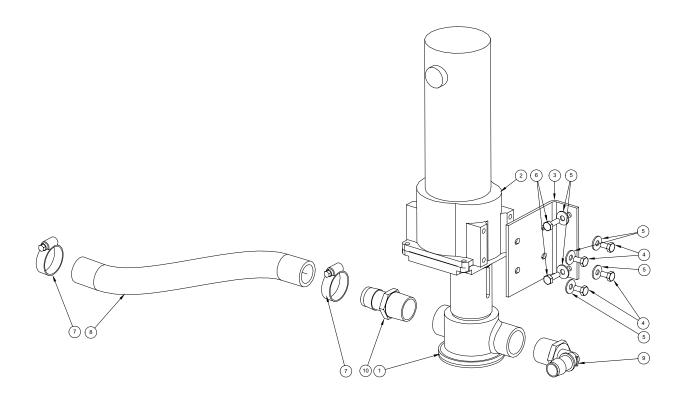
CDS 4.6/4.8 Chemical Pump Assembly C-4416 Rev B
